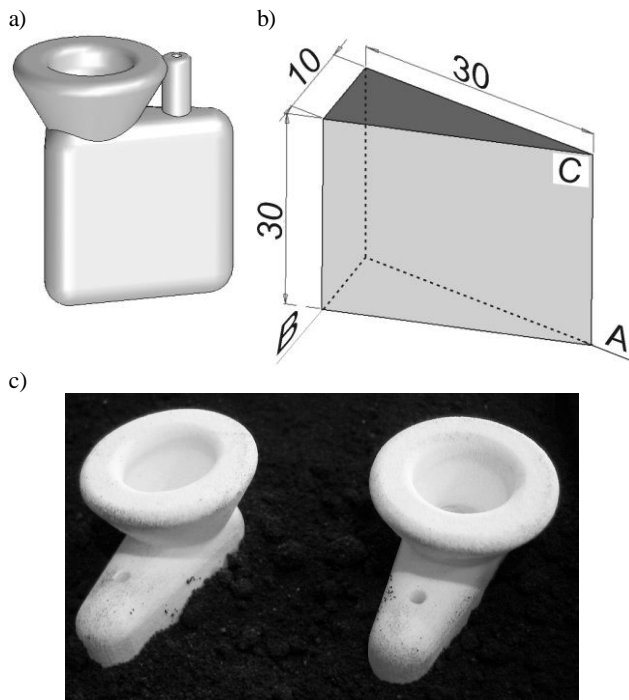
Mould for direct metal casting using RP: a) 3D solid model, b) inside geometry, c) printed moulds placed in a box and covered with moulding compacted sand
